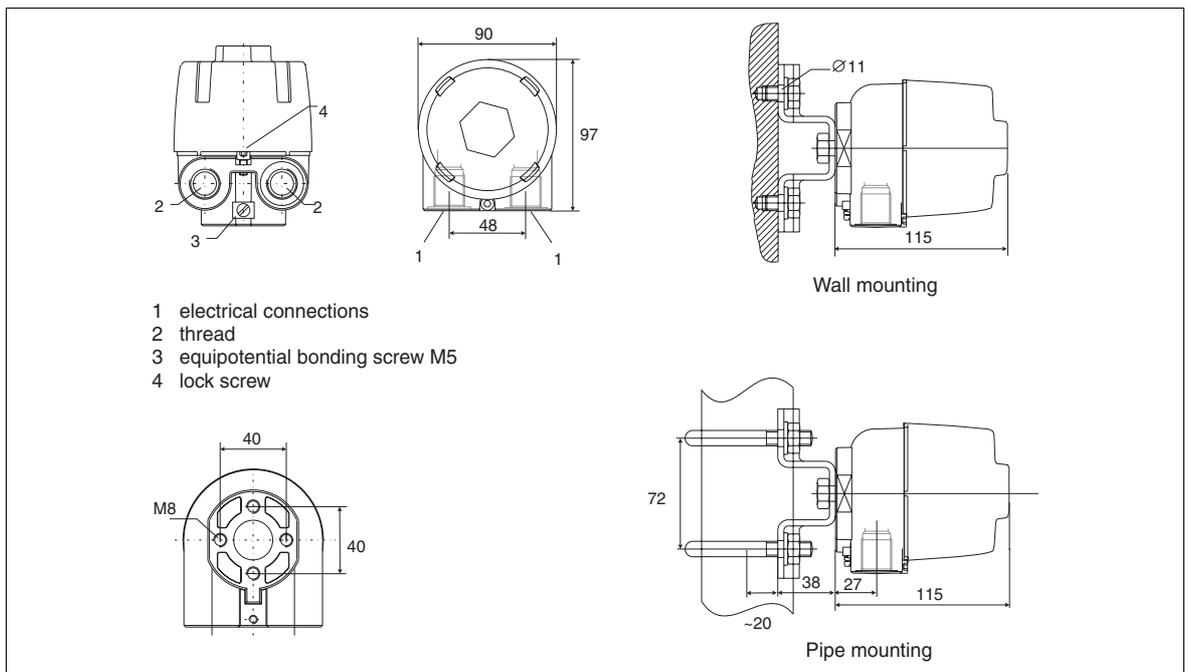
Dimensional drawings of TF12/TF212 (all dimensions in mm)
